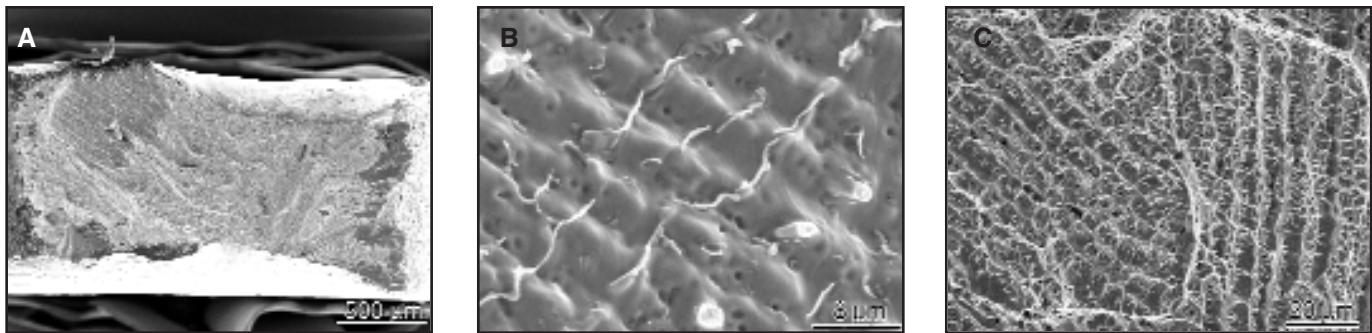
SEM images of the fracture surface of the EB tensile specimen of Heat 1. A — Low magnification showing crack on the upper left of the fracture surface; B — higher magnification of solidification crack surface showing sulfide stringers transverse to the solidification direction; C — fracture surface at center of specimen exhibiting a columnar structure and underlying ductile fracture typical of all the specimens.
